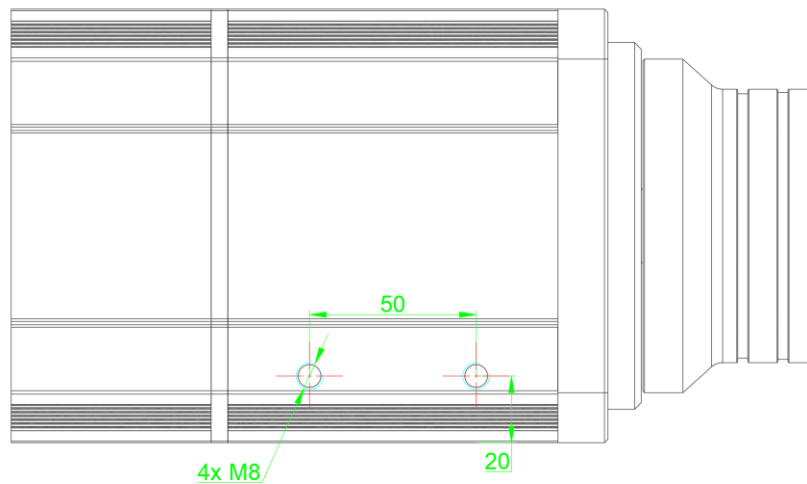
VNM Wheelbase Premier, Elite, Supreme side mounting pattern
